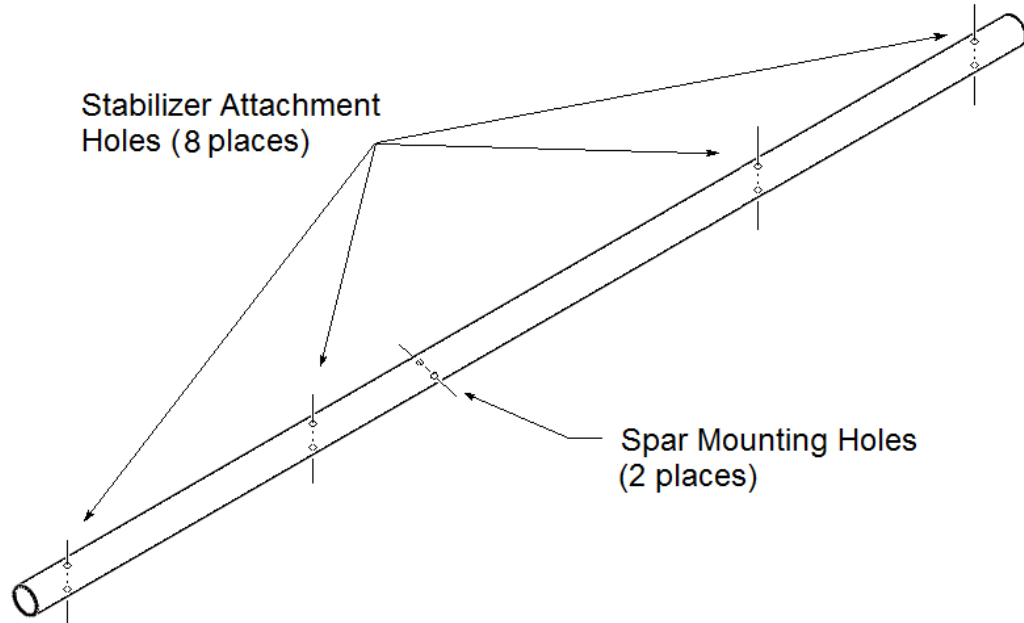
Stabilizer Spar Inspection – Stabilizer and Mounting Hole Attachment Points
